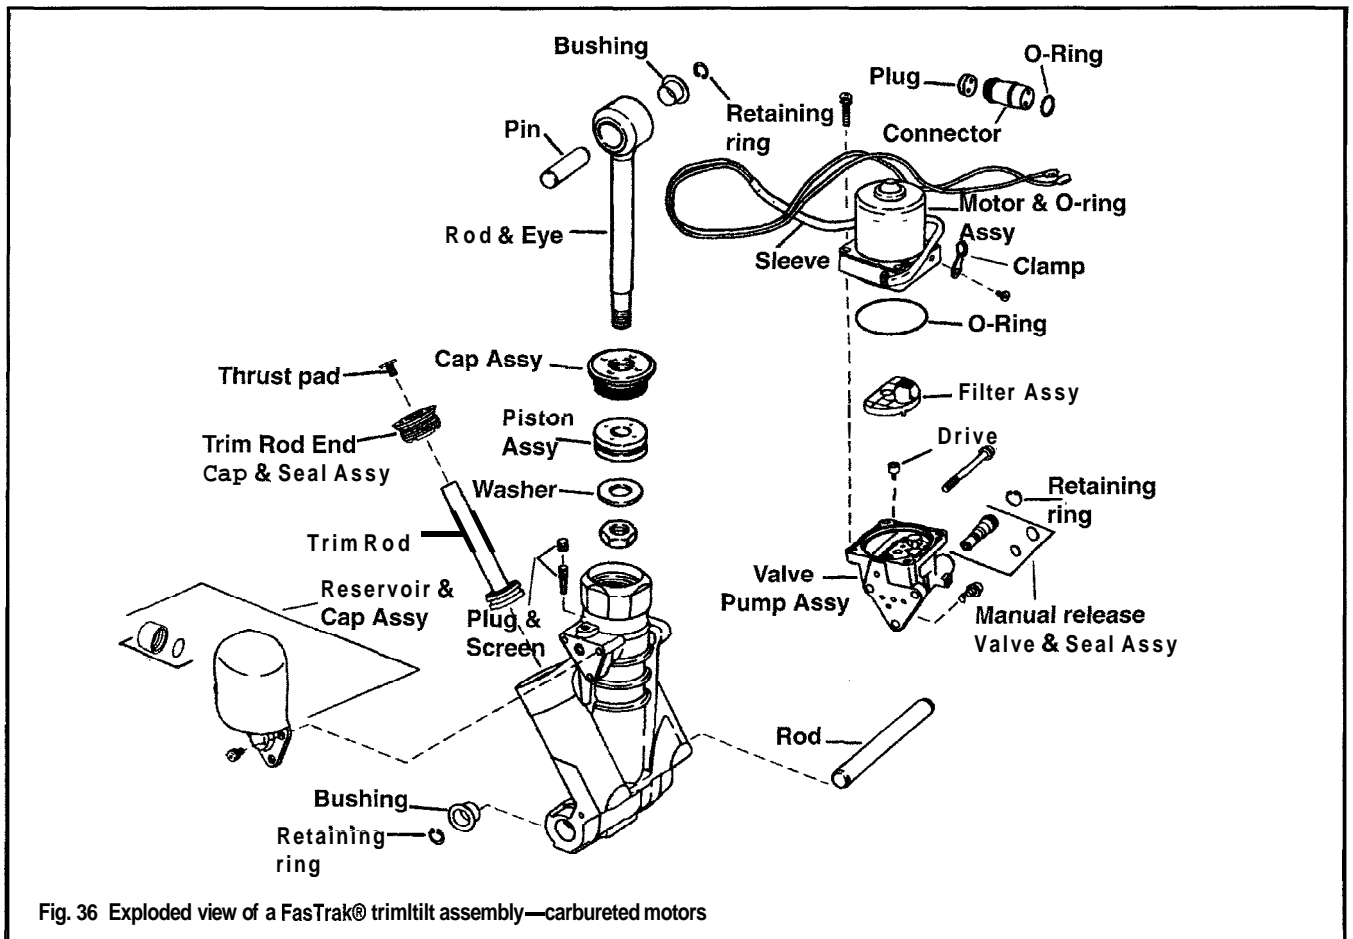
Exploded view of a FasTrak® trim/tilt assembly—carbureted motors
